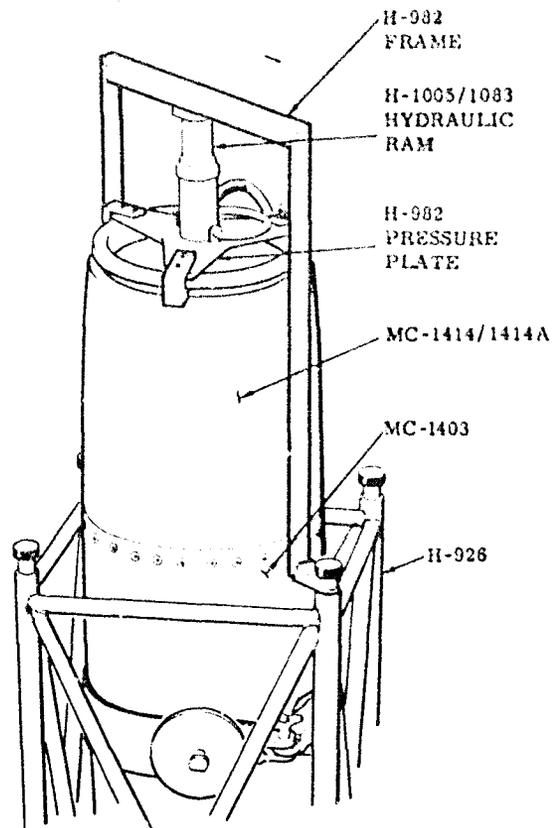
H982 Hydraulic Press Extension Being Used During the Assembly and Disassembly of the TX-57 Weapon
